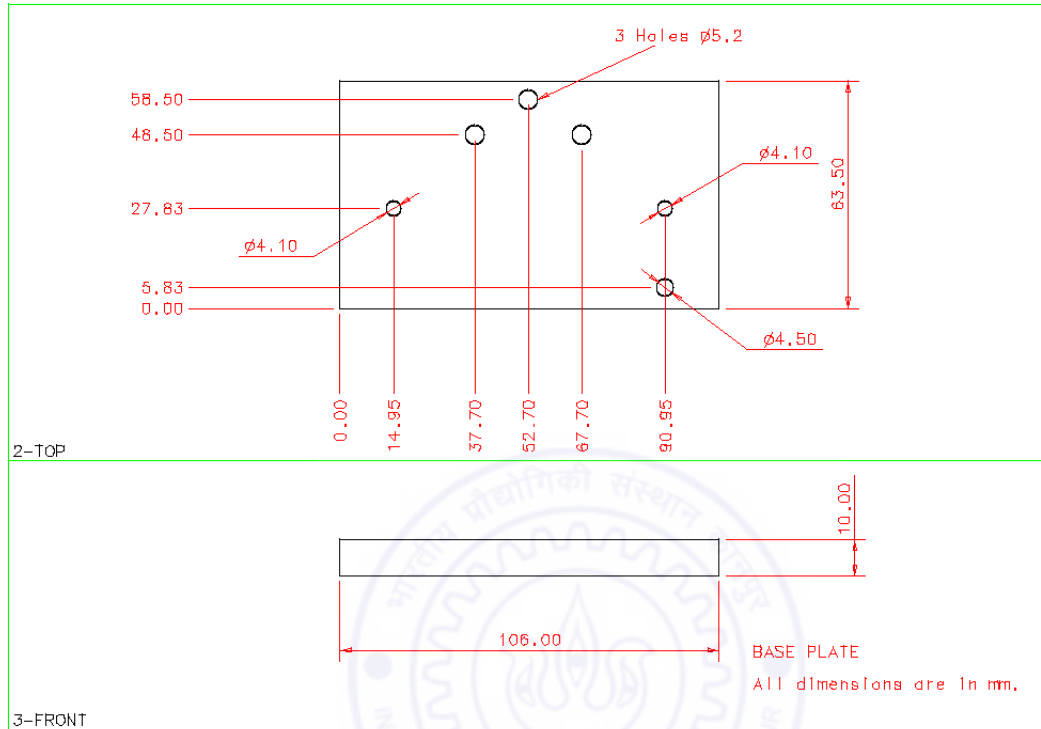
The base plate, on which the two supports are mounted. The base plate has holes that align with the locator pins on the laser machine.
